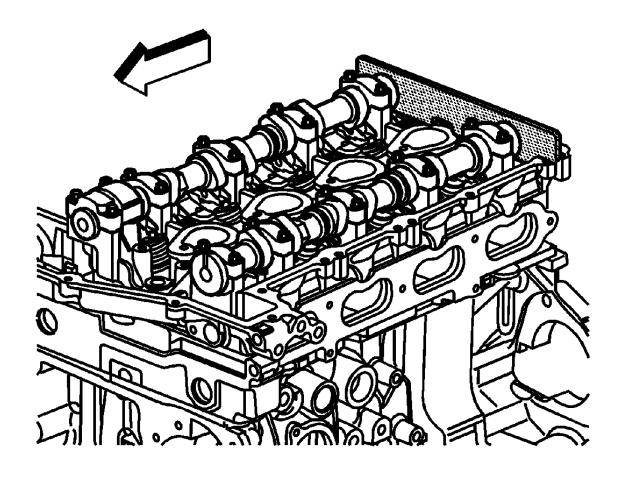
Camshaft Holding Tool Courtesy of GENERAL MOTORS COMPANY
